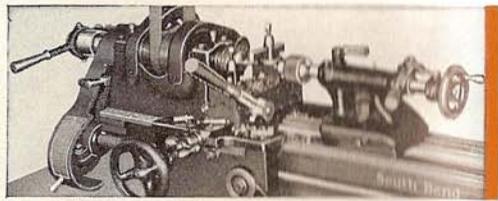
Lathe Equipped with Hand Lever Draw-in Chuck, H.L. Double Tool Slide and H.L. Tailstock.
